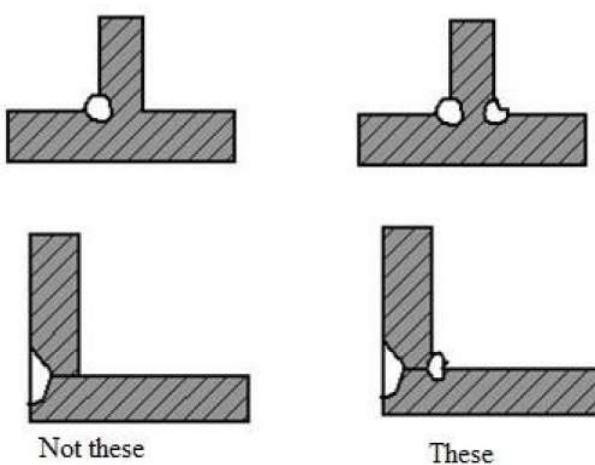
Use opposing welds to reduce angular distortion
